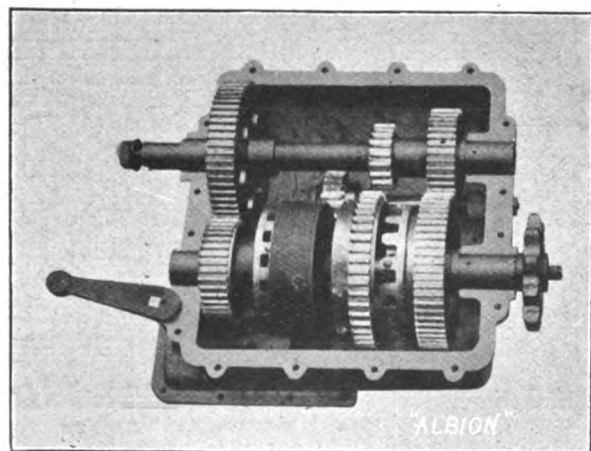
THE ALBION CHANGE-SPEED GEAR.
